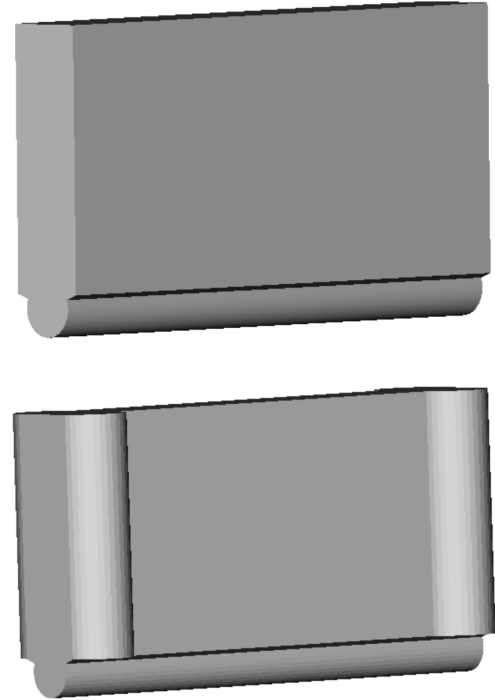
CAD drawings of investigated flap shapes: flap with square edges (EE1, top), flap with additional half-tubes on front and back face (EE3, bottom) (Asmuth, 2014)
